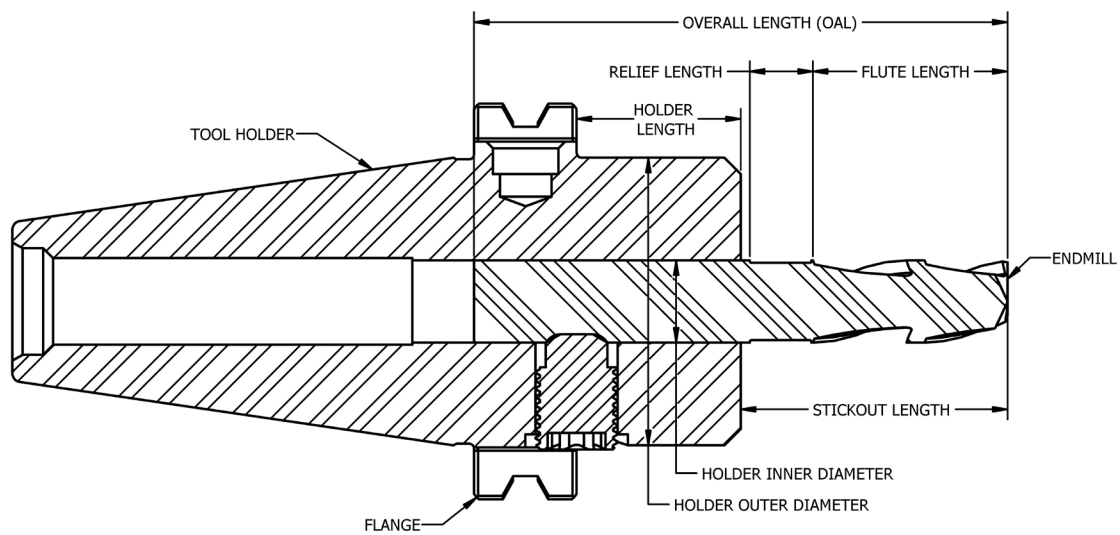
Nomenclature for tool holder and endmill measurements.
